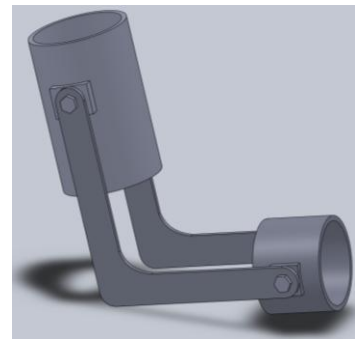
A SolidWorks schematic of the boomerang design element showing the basic premise for attachment of the rigid boomerang piece to each cuff. This rigid piece would support the lower arm at the desired carrying angle and reduce unwanted movement of the lower arm while allowing hand mobility.
